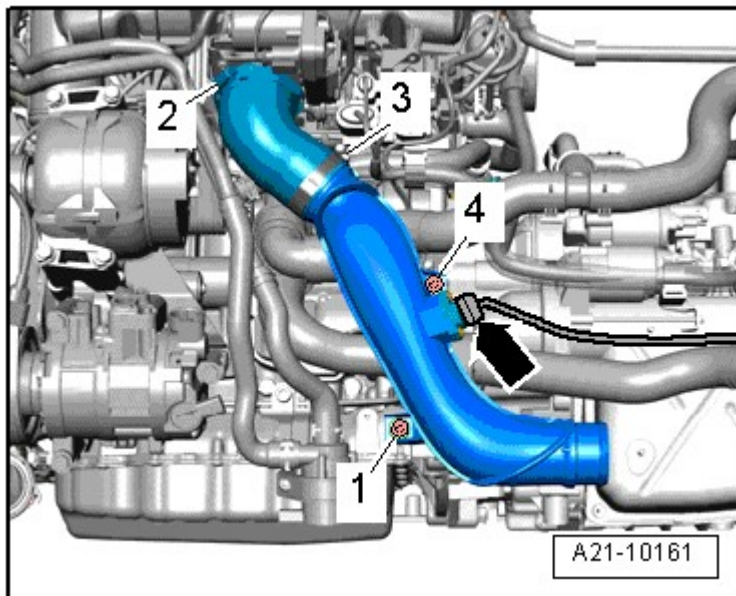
Identifying Air Flow Housing, Electrical Connector And Guide Hose
